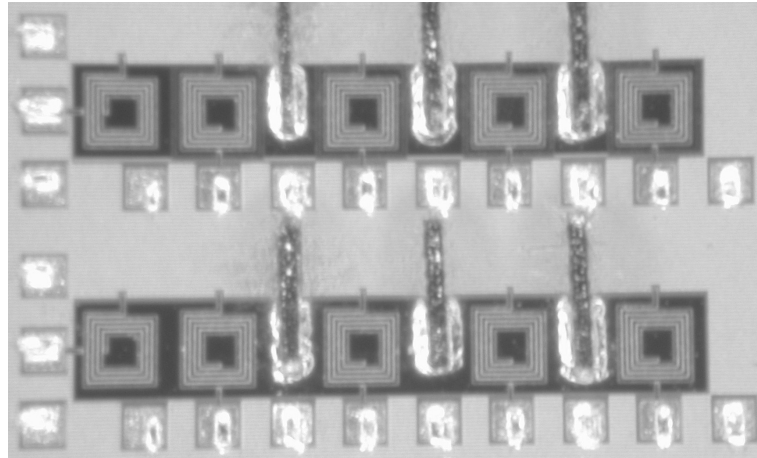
Chip photo of experimental set-up after laser cutting of the fixture ground-ring.
